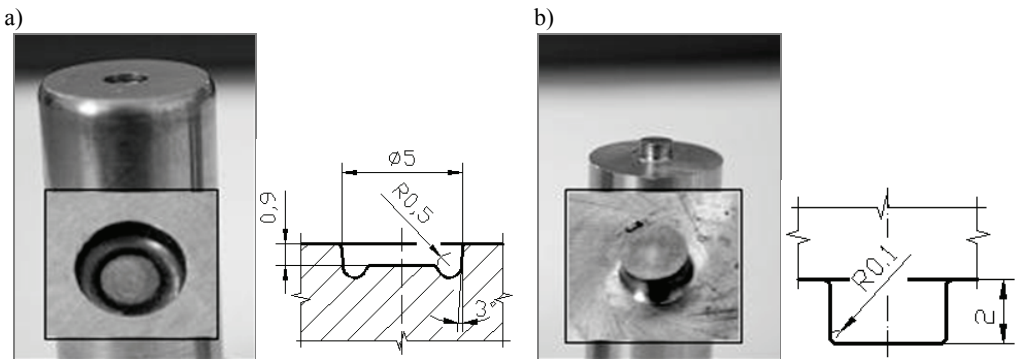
Clinching joint tools and their main dimensions: a) die, b) punch
